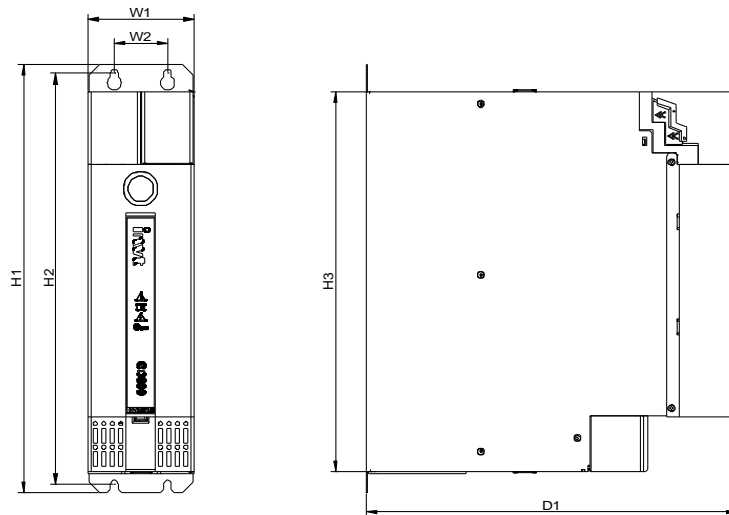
Wall-mounting drawing for the 380V 11–37kW inverter units
